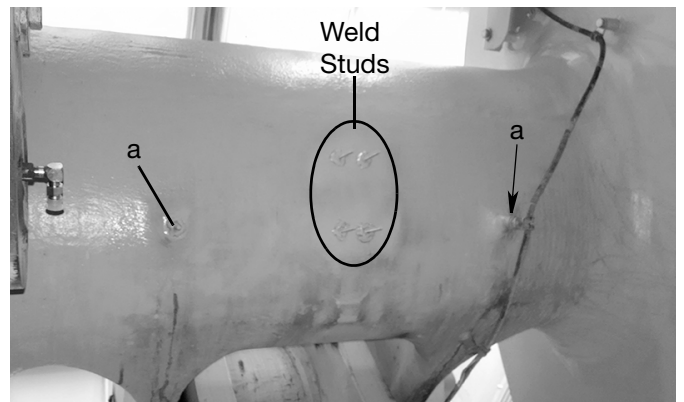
Front Secondary: Align and center divider valve weld studs between pads (a) as shown.
